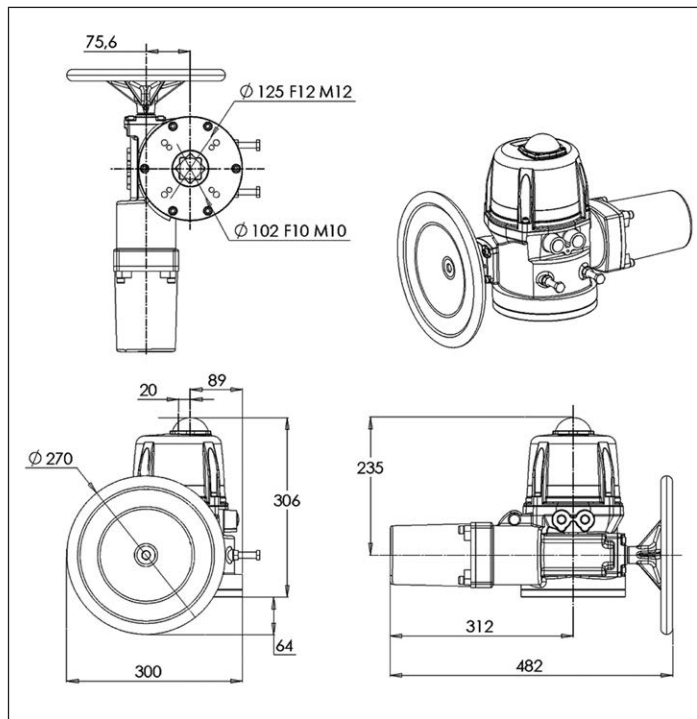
Dimensions Type 3005 at torque 600 - 1000 Nm
